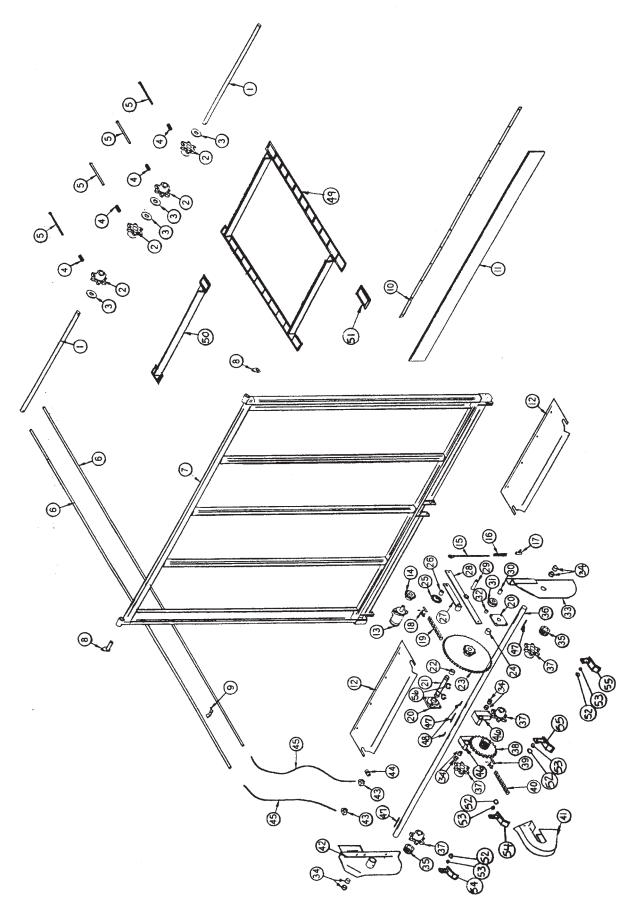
REAR DOOR & DRIVE SYSTEM
